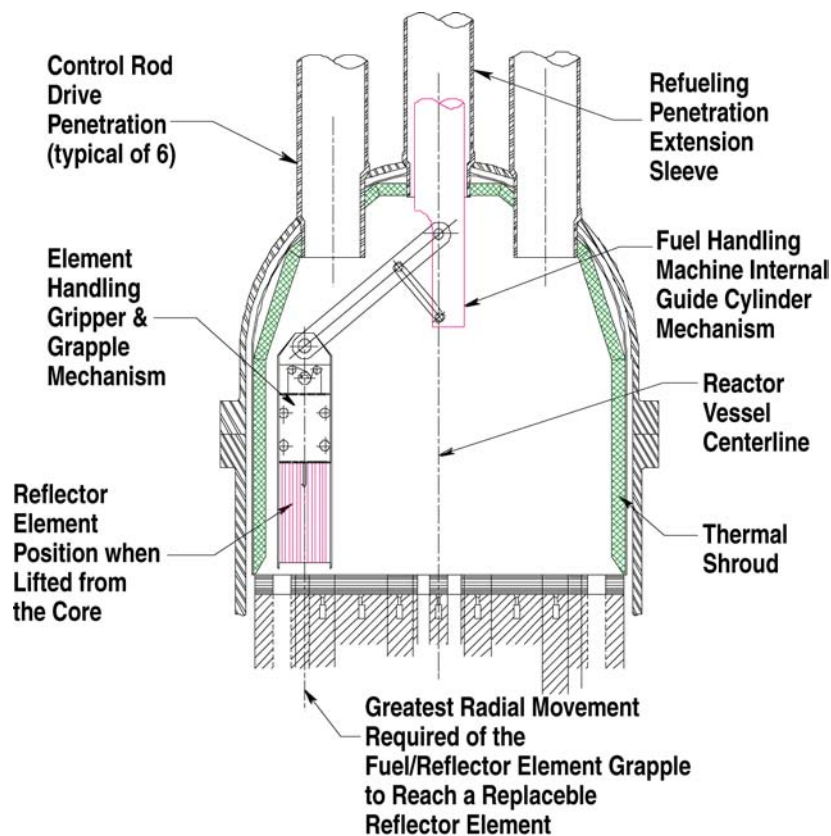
Fuel handling machine element grapple positioned in the RV.
